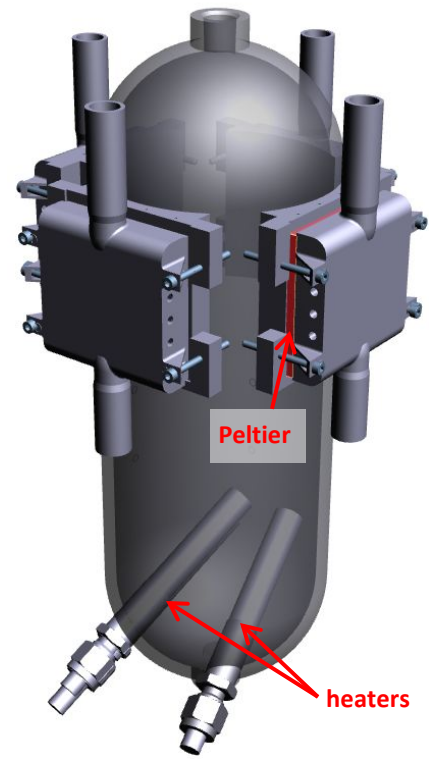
CAD drawing of the accumulator with heaters and Peltier coolers
